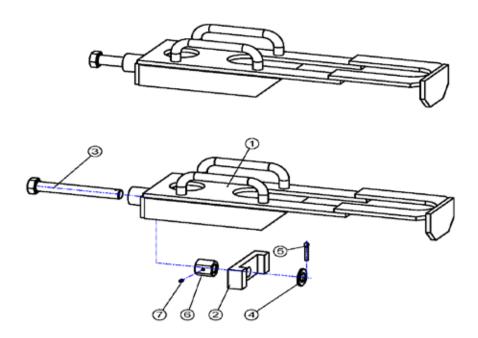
613700 Trigger Closing Tool ACL / VES ACL
